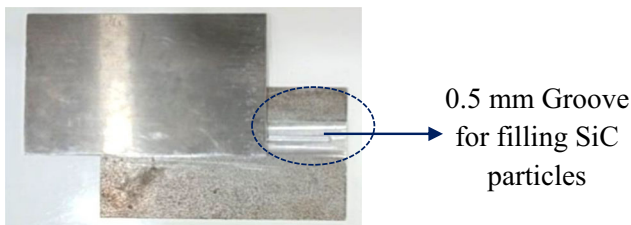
Modified interlock AA8011-AA7475 dissimilar aluminum sheet
